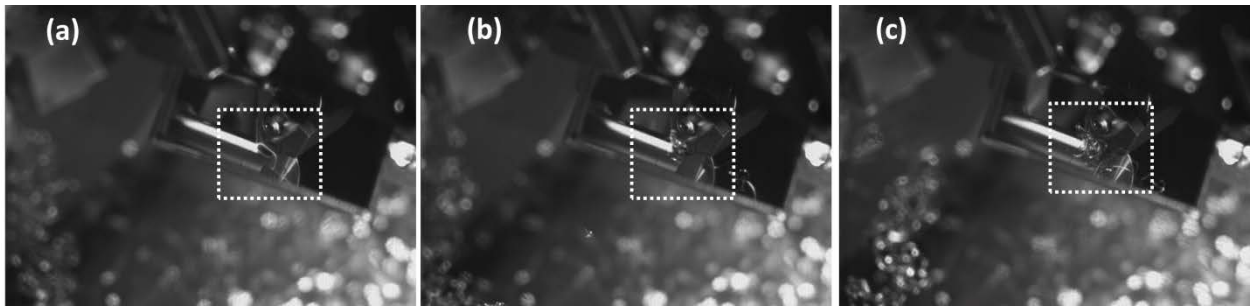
Chip entanglement and damage to the surface roughness, (a) chip is exiting with no entanglement, (b) chip start to trap in the clearance zone between tool and workpiece, and (c) full entanglement with workpiece/chip rubbing against each other
